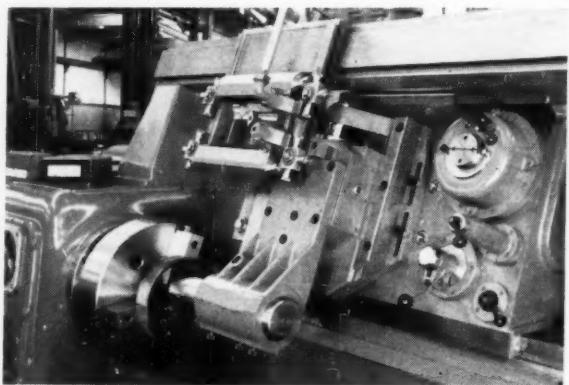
Internal copy-machining of ring on double automatic copying lathe
